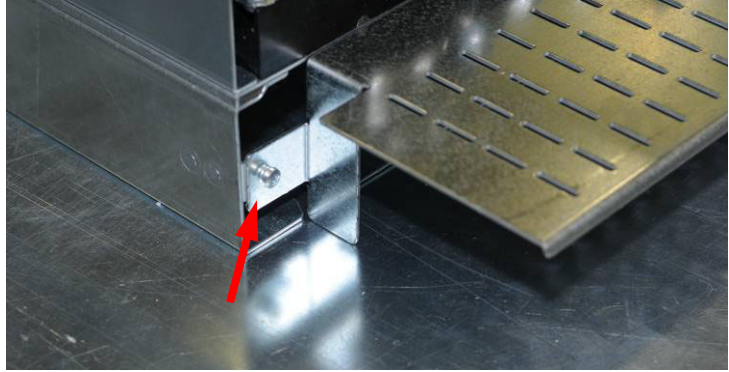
Cable-clamp bracket mounted on mounting tab, left side of D3/D4 frame.
